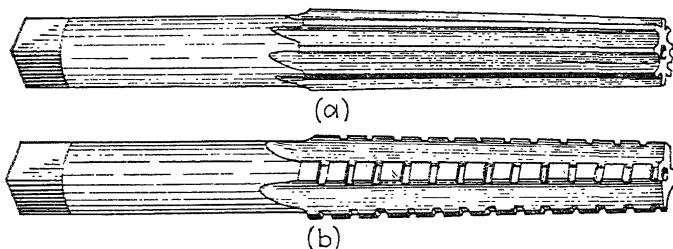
Hand reamers for taper holes. (a) Finishing; (b) roughing.
